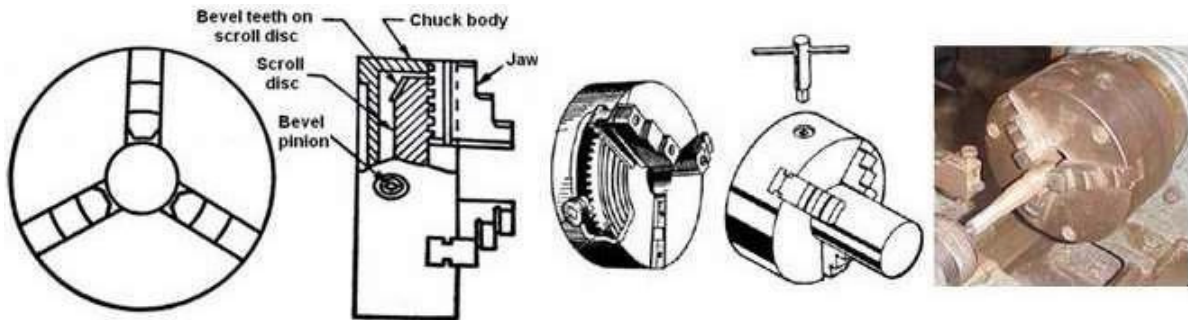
(a) 3-jaw self centring chuck or universal chuck
